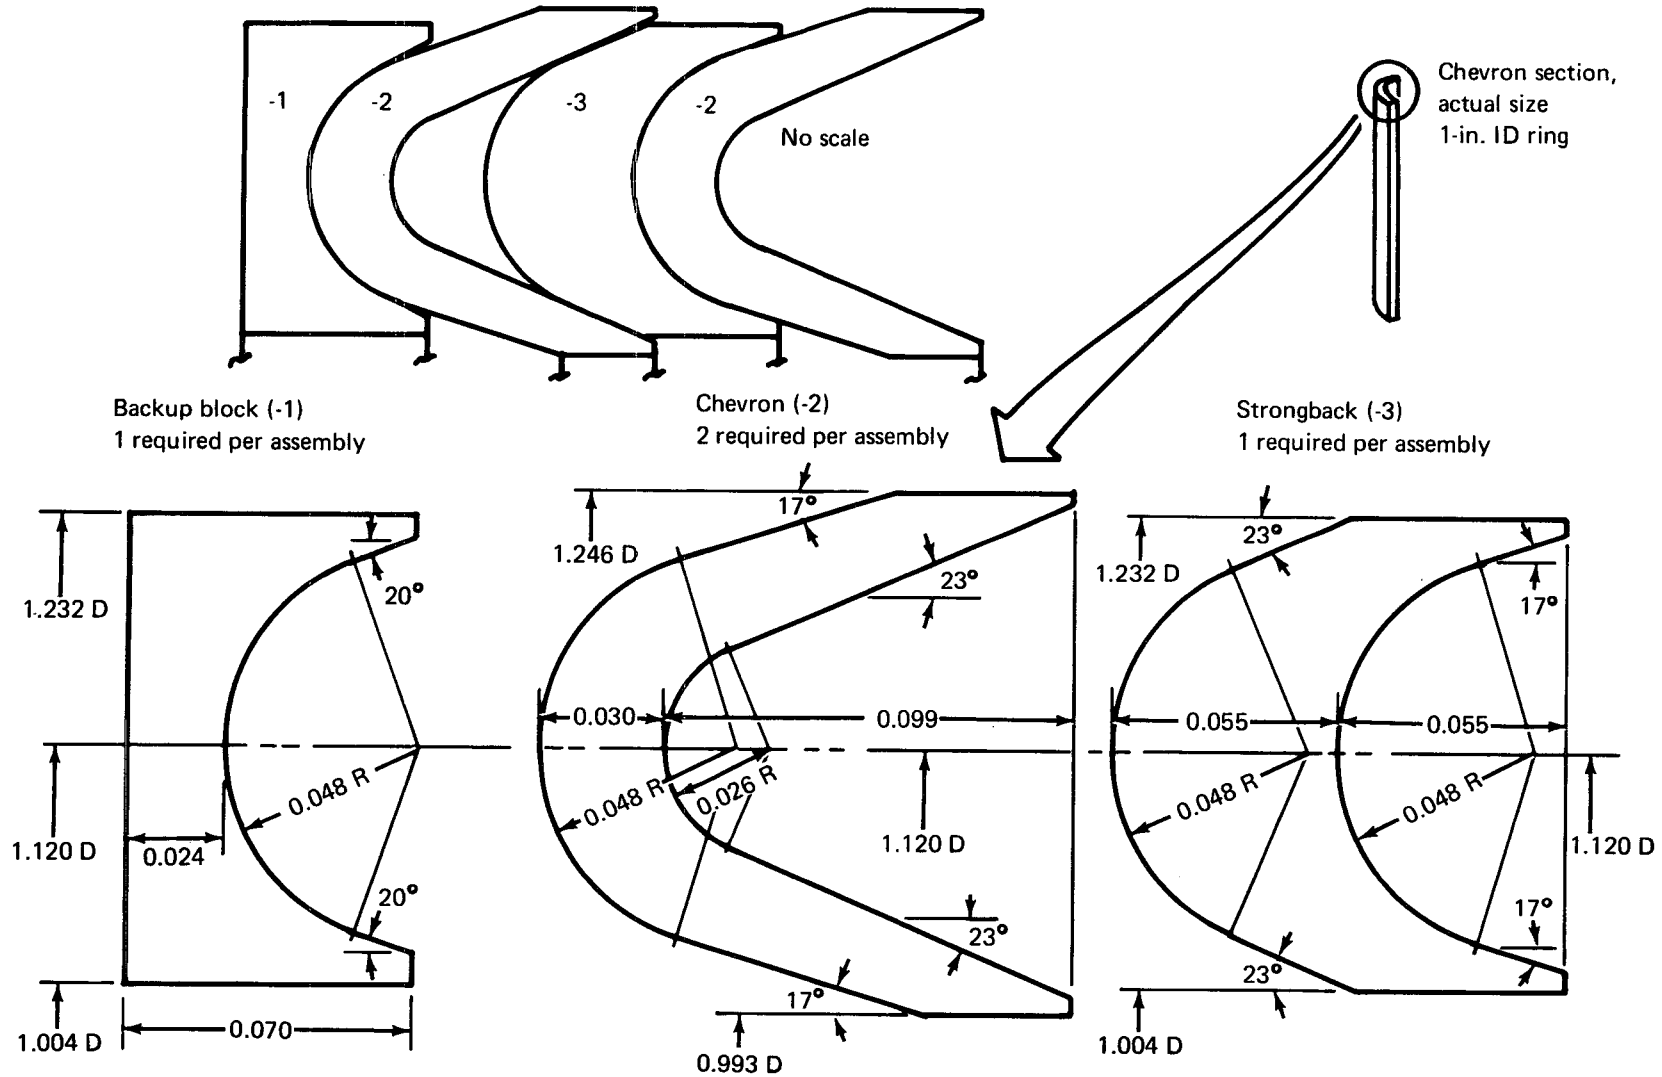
SECOND-STAGE ROD SEAL ASSEMBLY, 6.35 CM (2.5 IN.) K-SECTION
